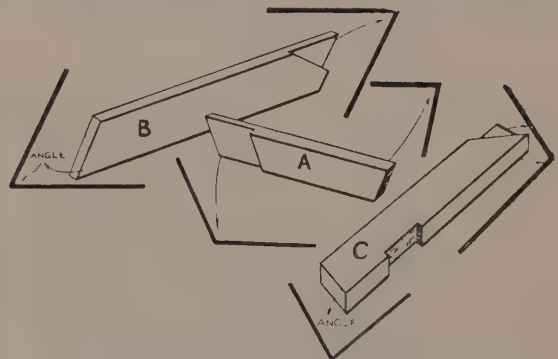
SHOWING JOINTS FOR PARTS A, B AND C, WITH THEIR ANGLES.
